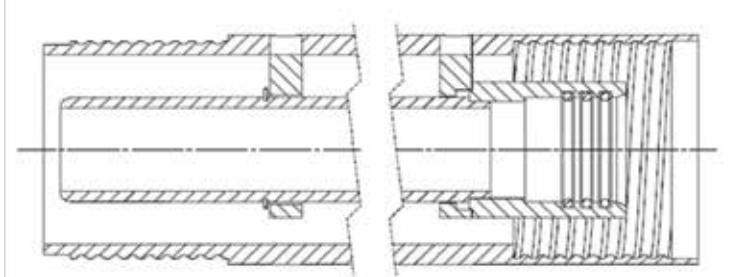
Cross section view of Pilot Tube. Construction of a tube within a tube held in place by centralizers.
